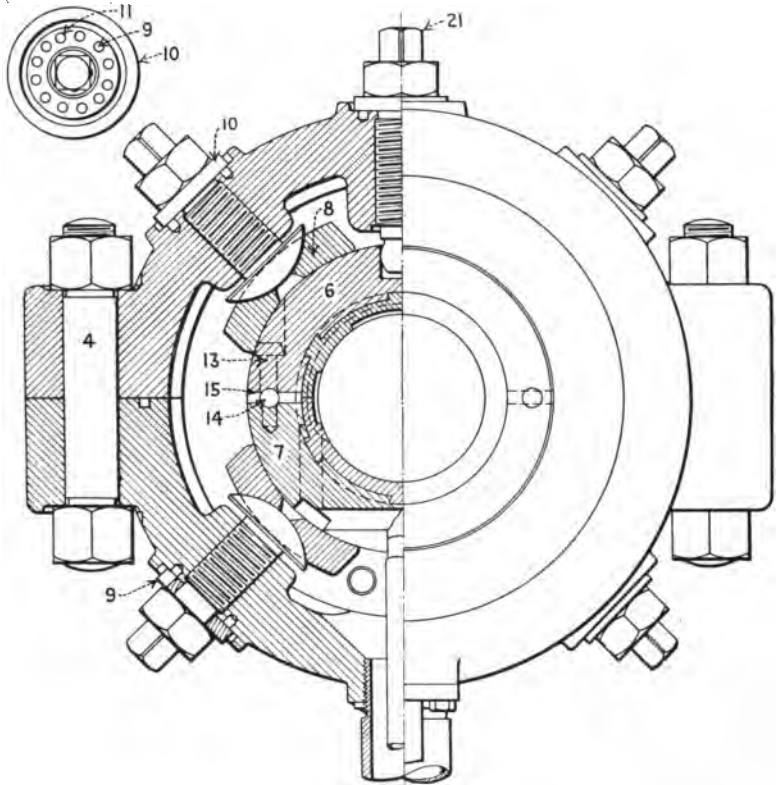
Wulsty Castle*: Cross Section of Main Bearings
